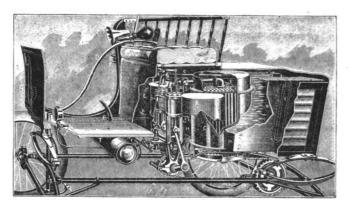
PART-SECTIONAL VIEW OF STANLEY STEAM-CAR, SHOWING LOCATION OF ENGINES AND BOILER.
